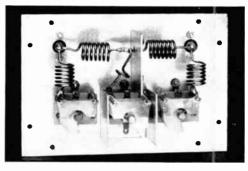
Construction of the harmonic filter, Dimensions should be followed fairly closely for optimum results. The center-to-center distance between the coax connectors is 412 inches. Mounting centers of the variable condensers are on a line 21/4 inches below and parallel to a line through the centers of the coax fittings.
